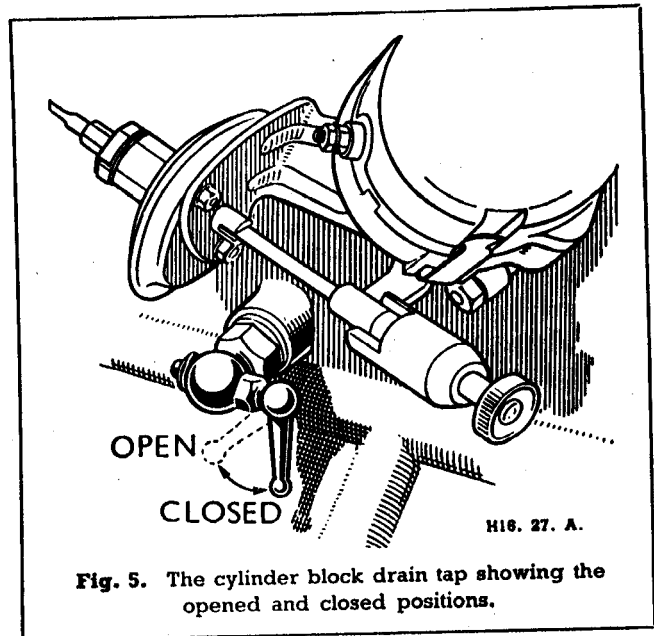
The cylinder block drain tap showing the opened and closed positions.
